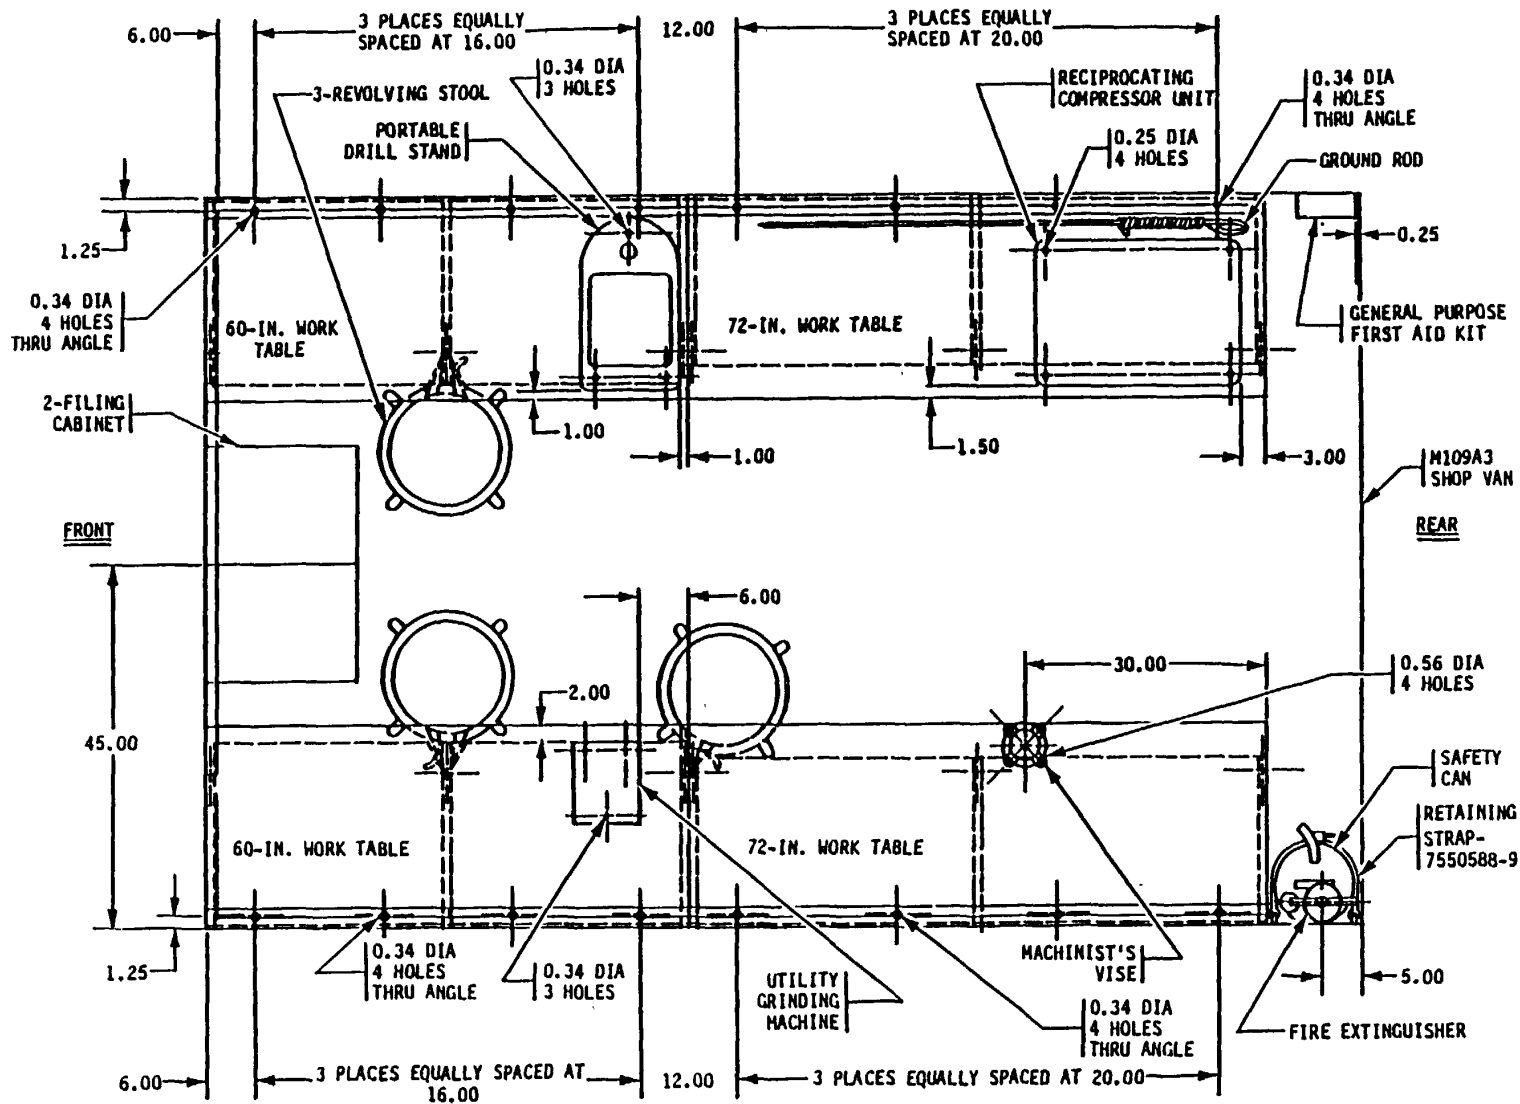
Components to be Mounted, Floor Plan, M109A3.
